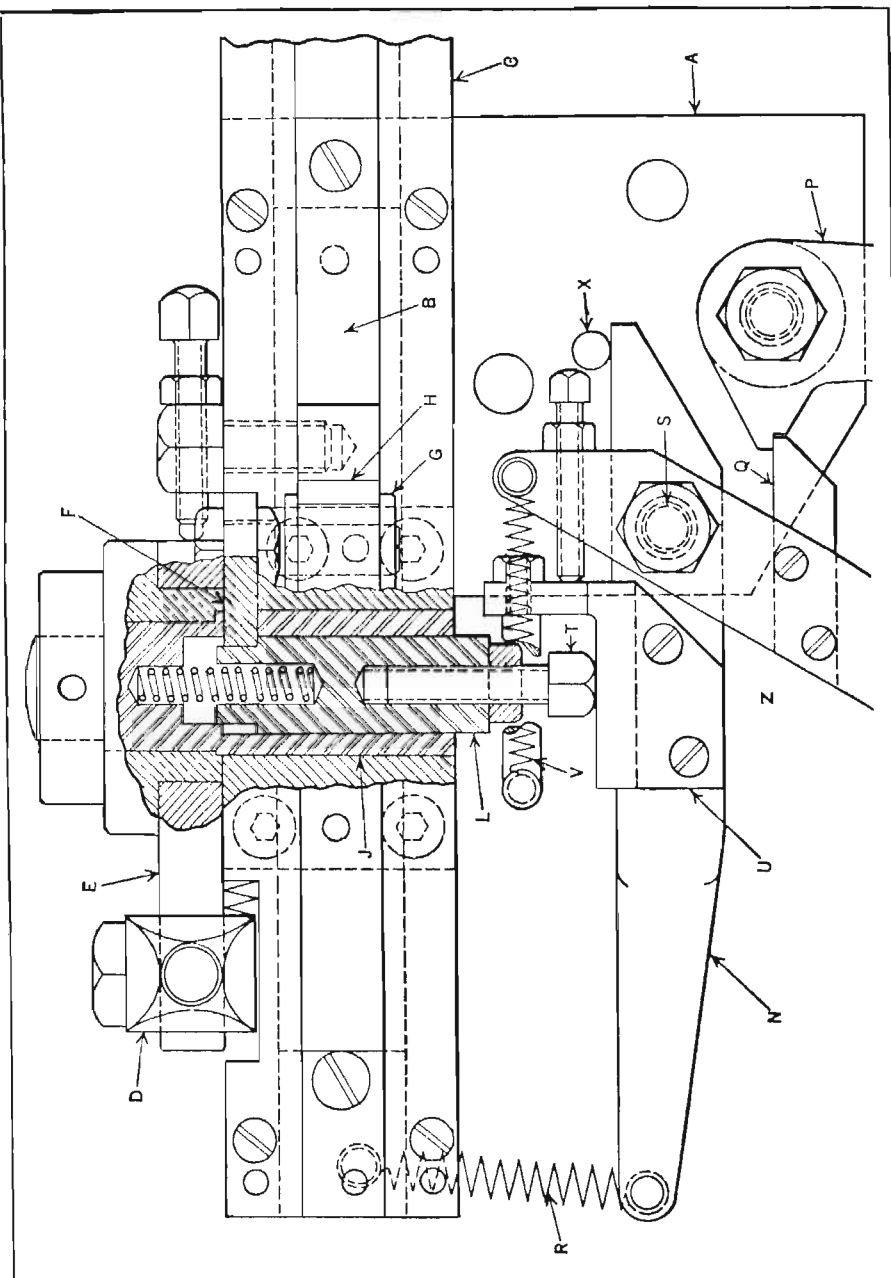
Plan View of Power Press Stop Mechanism (shown in Fig. 13) which Disengages Clutch when Magazine Feed Jams
